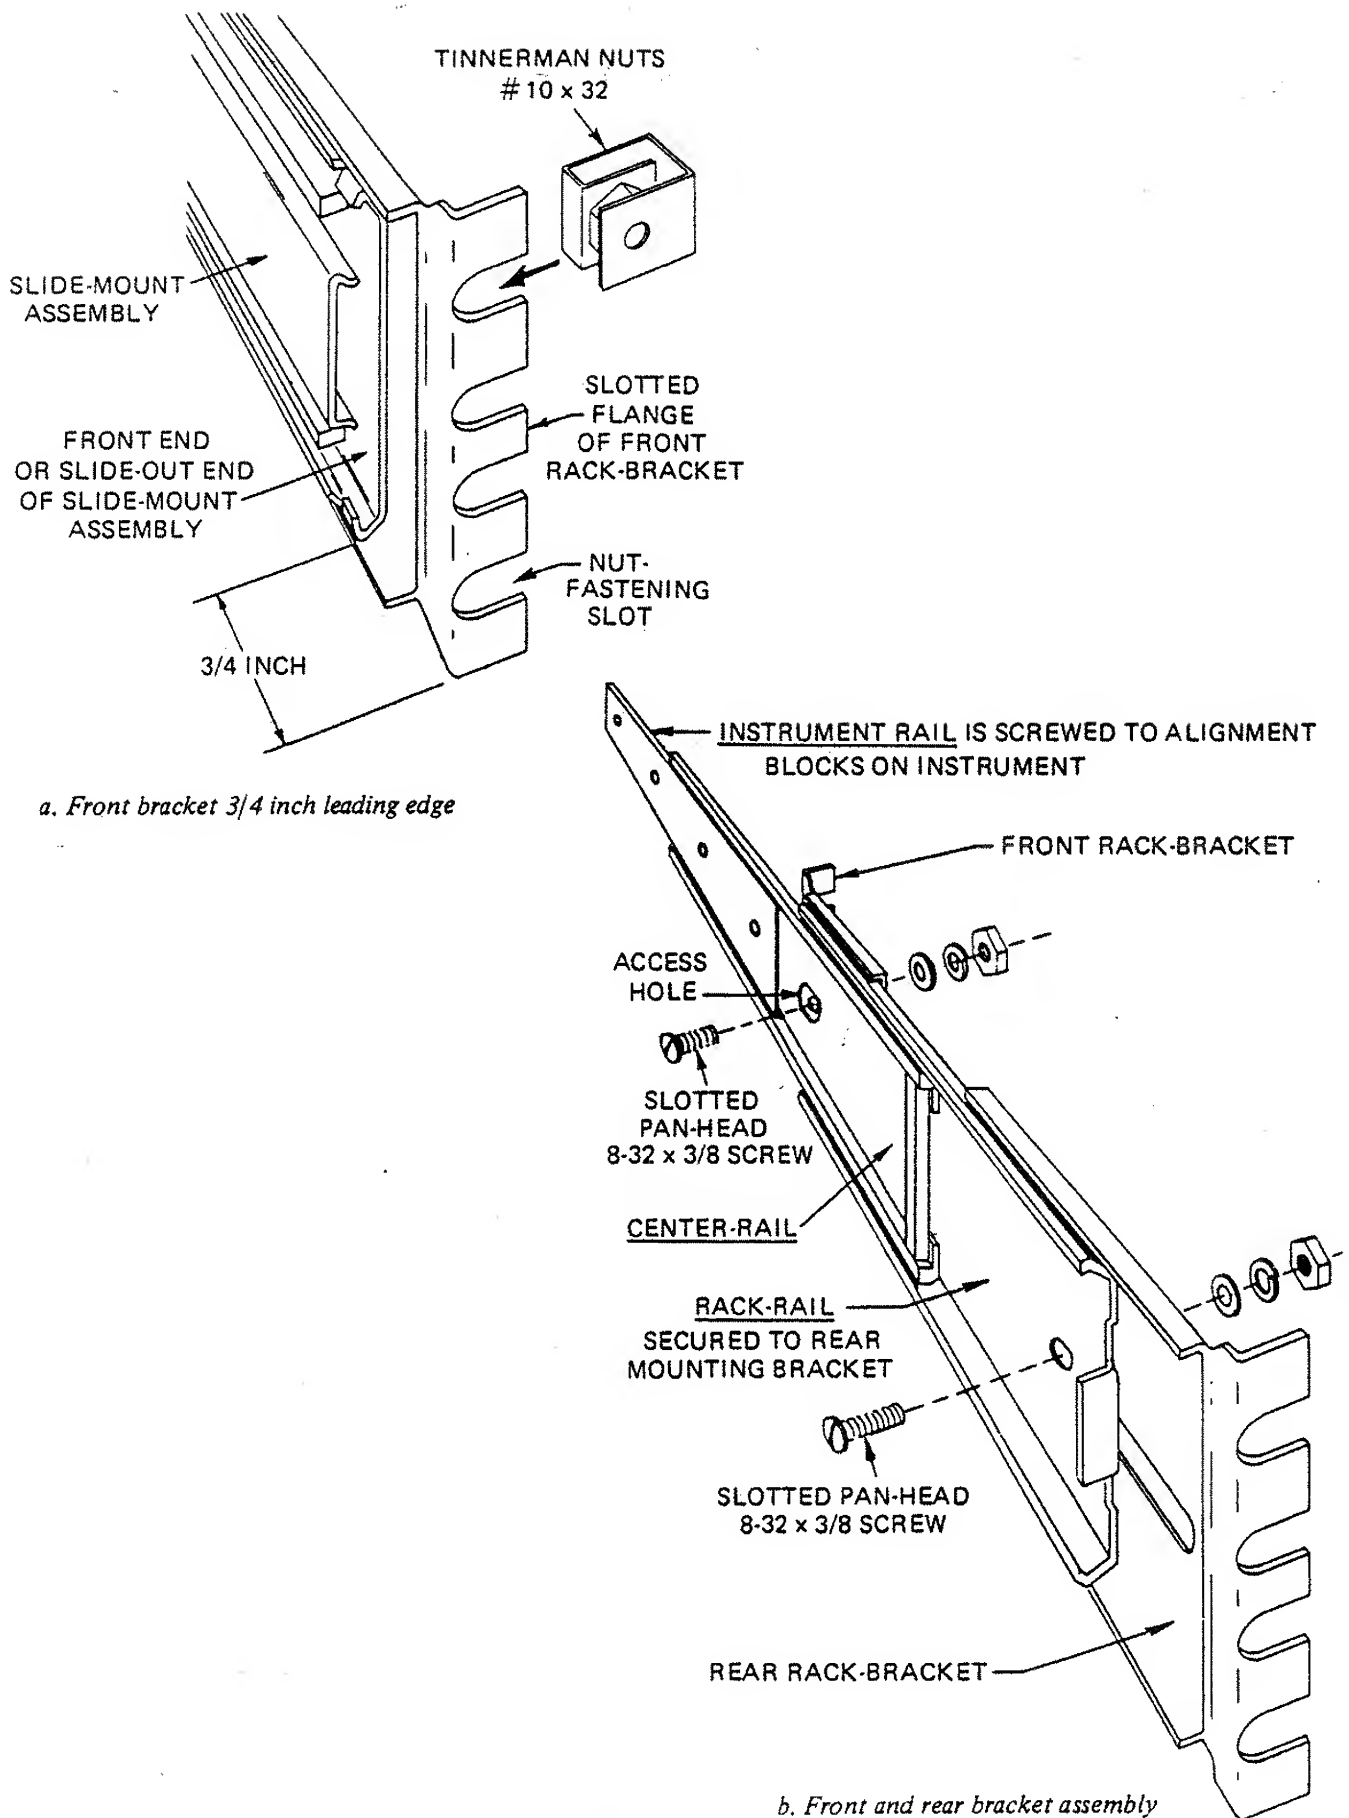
A/B-Slide-Mount and Bracket Assembly
